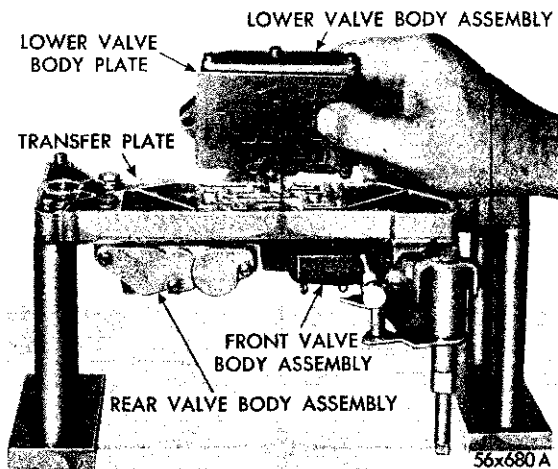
Removal and Installation of Lower Valve Body Assembly and Plate
